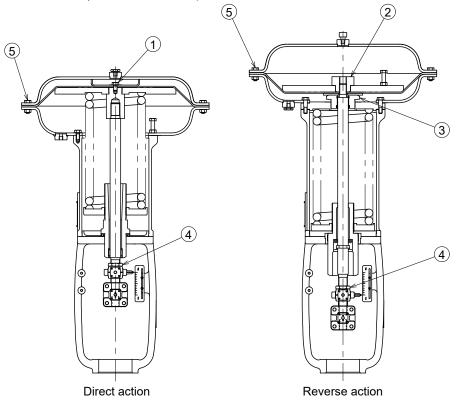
Threaded parts to tighten (on the VA5 actuator)
